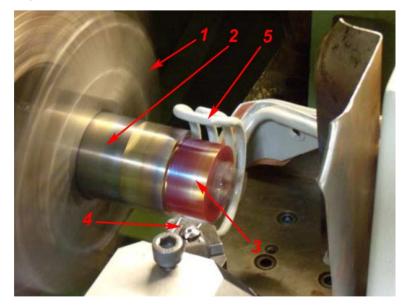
An example of induction heating of a workpiece: 1 – machine spindle; 2 – workpiece; 3 – heating zone; 4 – cutting tool; 5 – inductor
